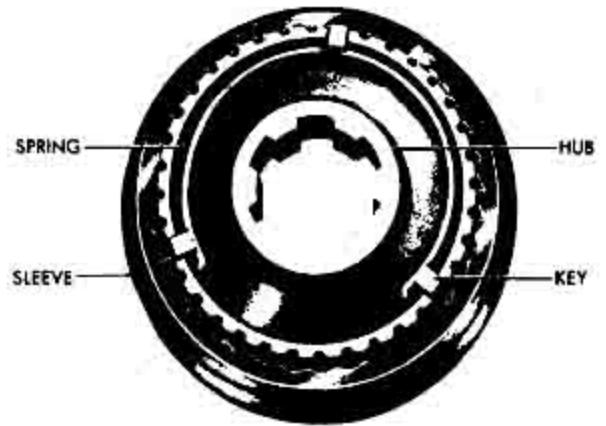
Synchronizer Assembly (Less Synchronizing Rings)
